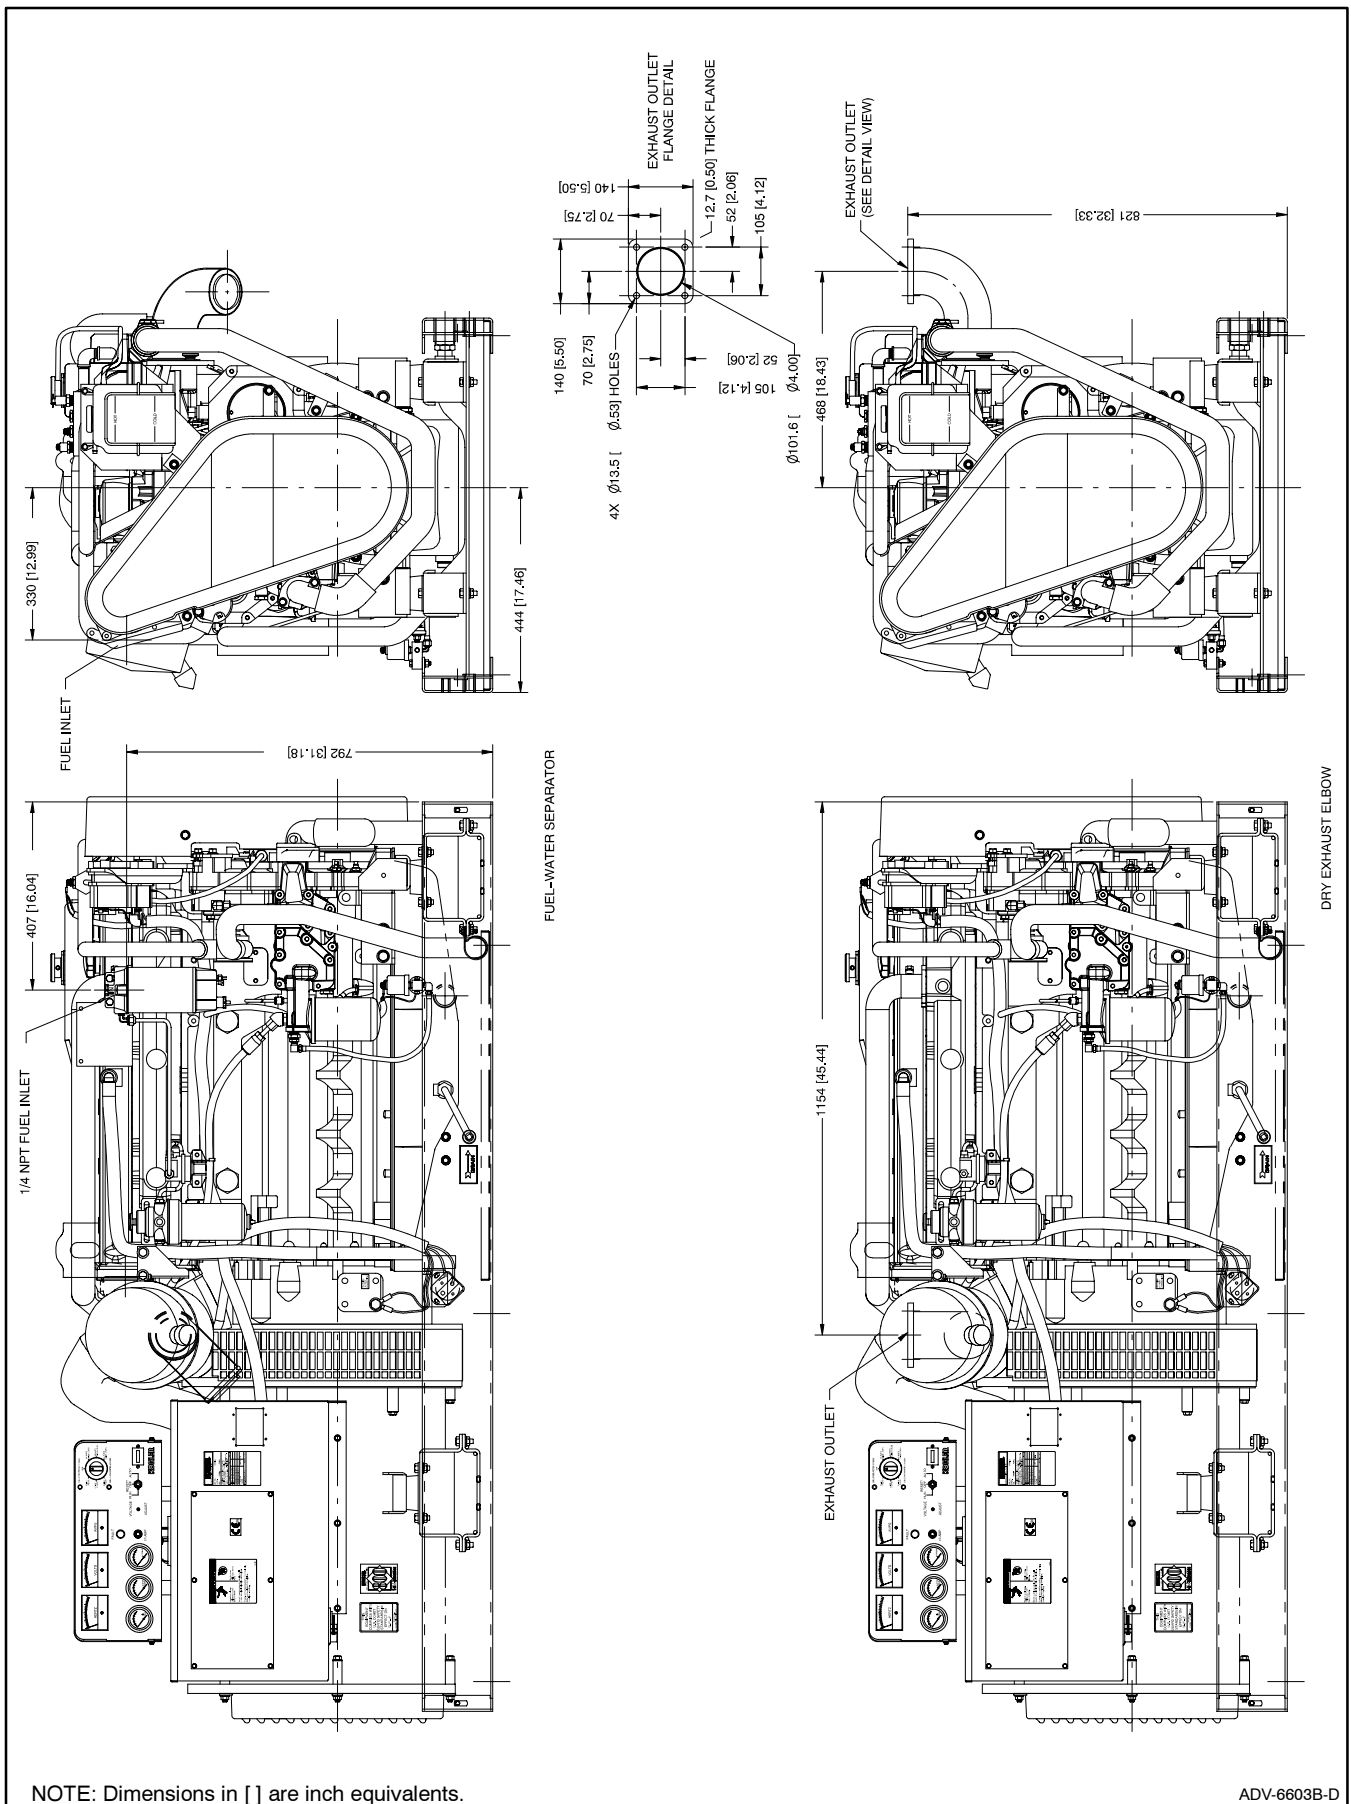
Dimension Drawing, 70/80EFOZ and 80/99EOZ with Fuel/Water Separator and Dry Exhaust Elbow
